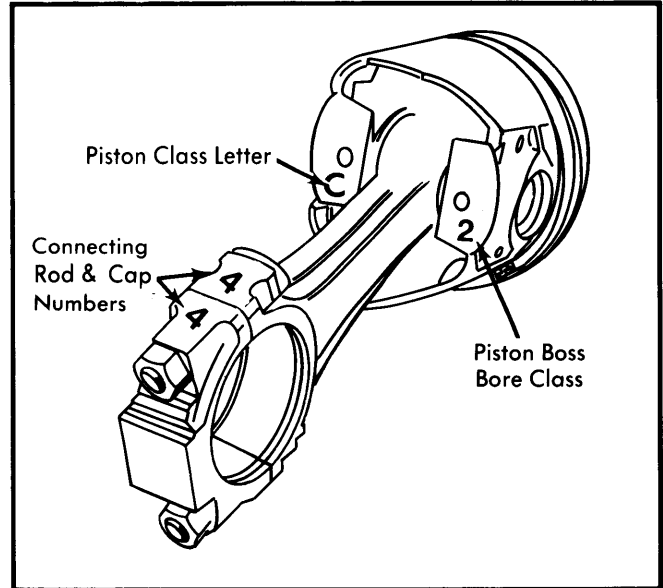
Piston & Connecting Rod Assembly Showing Identification Class Numbers
